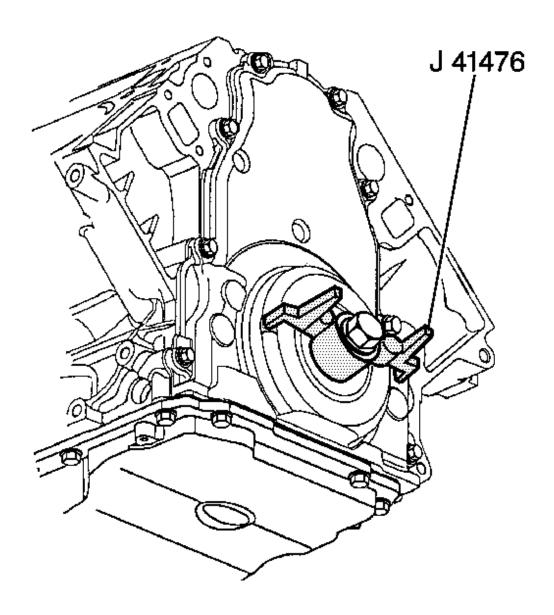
View of J 41476 Installed To Front Cover Courtesy of GENERAL MOTORS CORP.
